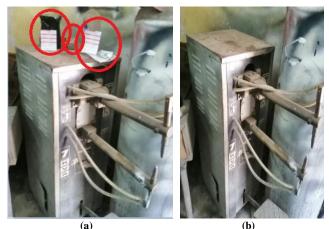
Result of the application of the 1S in spot welding, (a) before and (b) after
